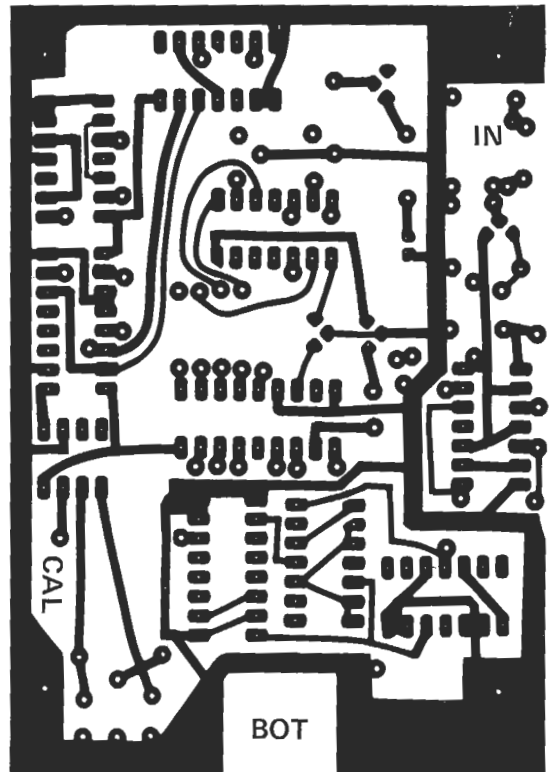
THE OTHER SIDE OF THE CIRCUIT BOARD. This full-size pattern used with the one on Fig. 4 can be used to make your own circuit board for this instrument.
